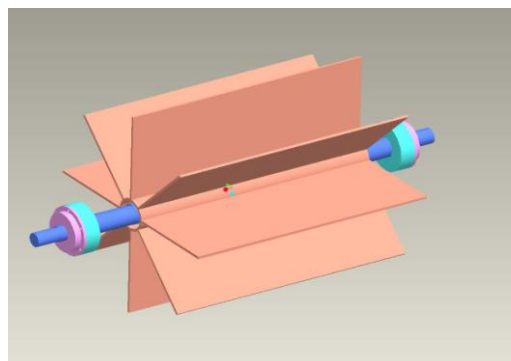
Assembly model of Rotary Airlock Valve in Pro-E
